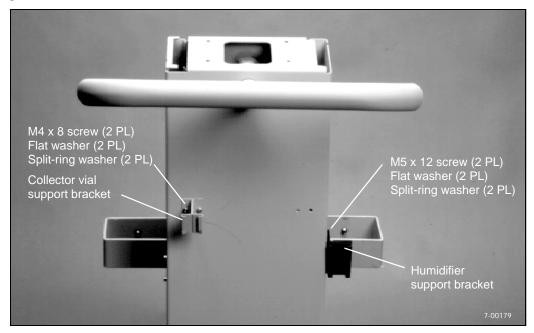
Removing collector vial and Fisher & Paykel Humidifier support brackets from cart
